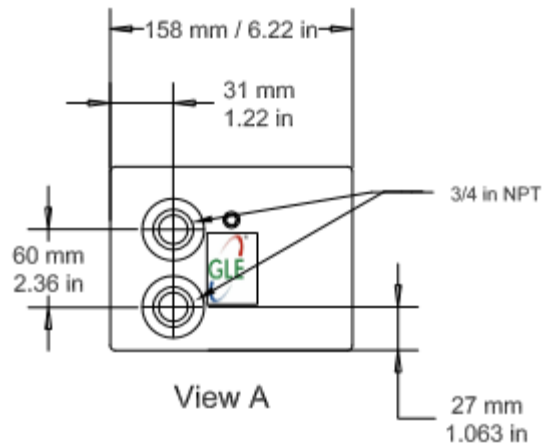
Pipe connectors diagram showing the design and dimensions.
